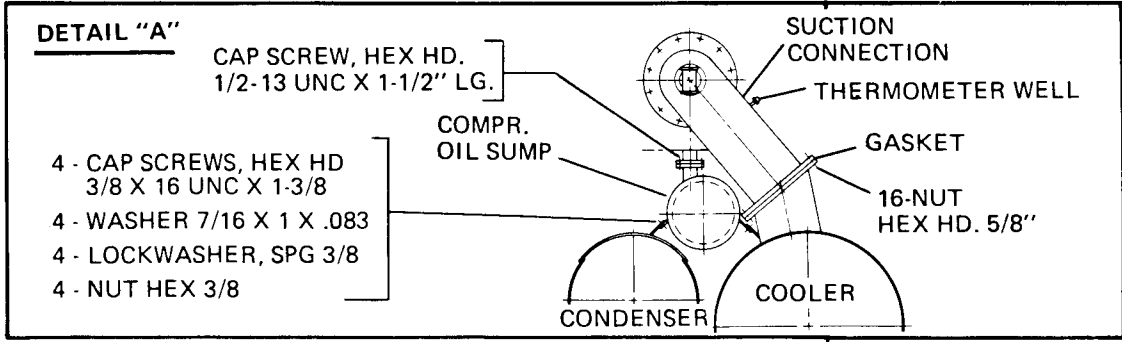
FIELD ASSEMBLY MODEL YT CODEPAK (YT G1 G1 E1 THRU YT L3 X3 E3)
